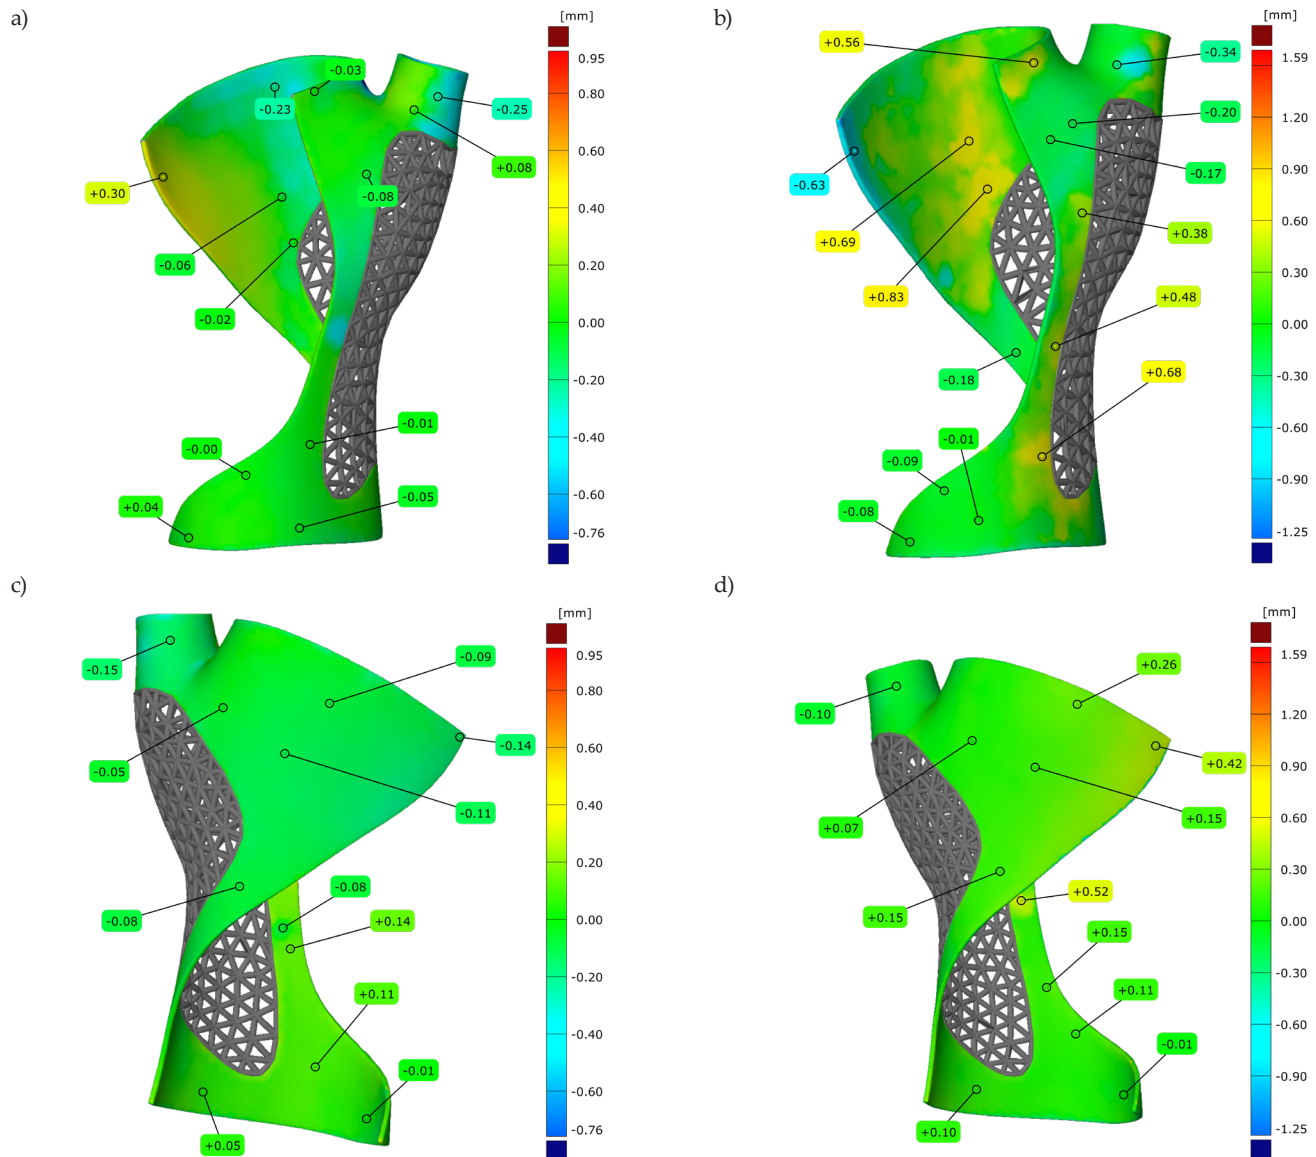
3D inspection of part one: a) PJM/MED610 first view, b) FFF/PLACTIVE first view, c) PJM/MED610 second view, d) FFF/PLACTIVE second view
